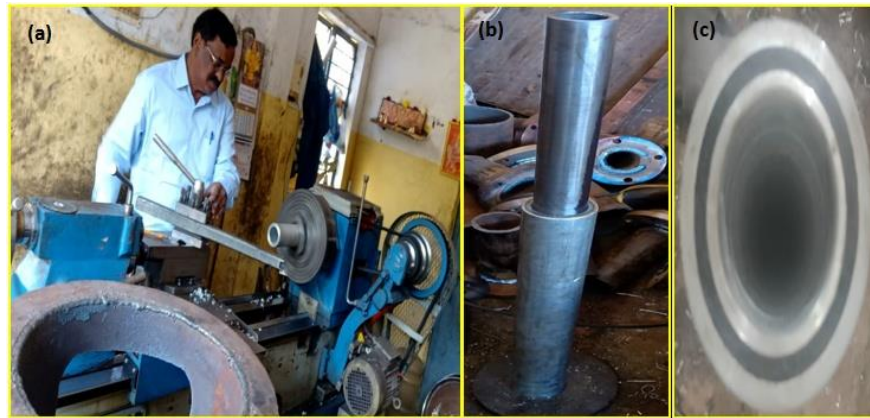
The preparation steps of sandwich pipe using hydraulic machine.
